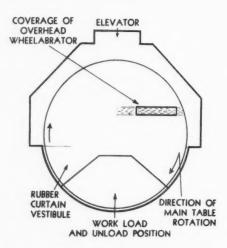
Diagrammatic view of operating principle of a single work table blast machine.
